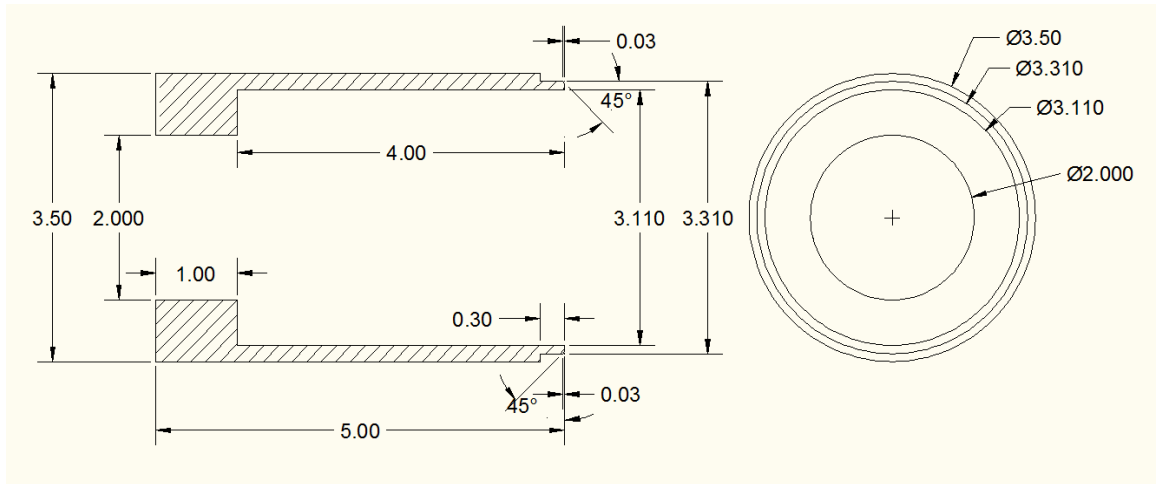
Foam body mold part A: 5 in main body (dimensions in inches, material: stainless steel)
